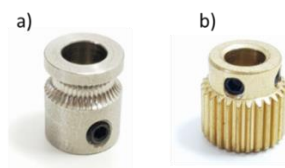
a) Type MK8 feeder pulley (old); b) Type MK8 26 tooth feeder gear (new).
